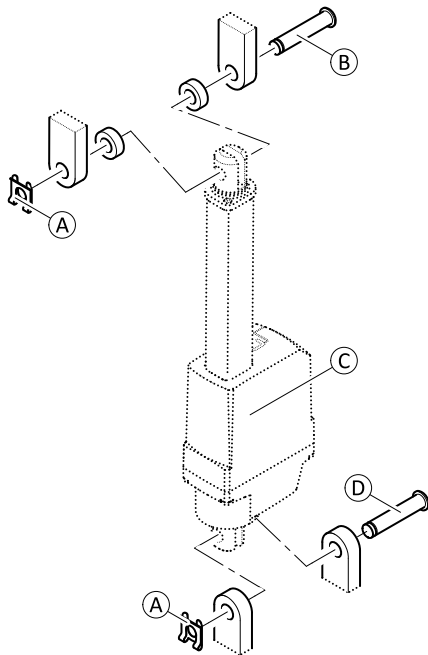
For better view only the actuator, pins, spacers and SL retainer clips are shown.
